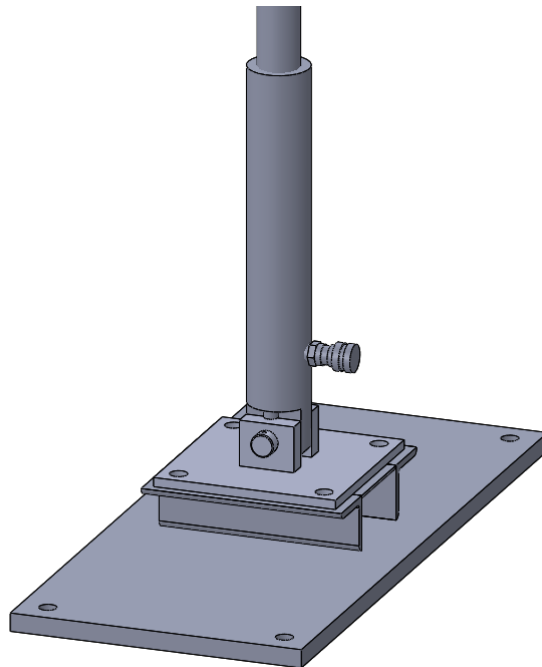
Hydraulic Cylinder Pivot and Floor Mount
